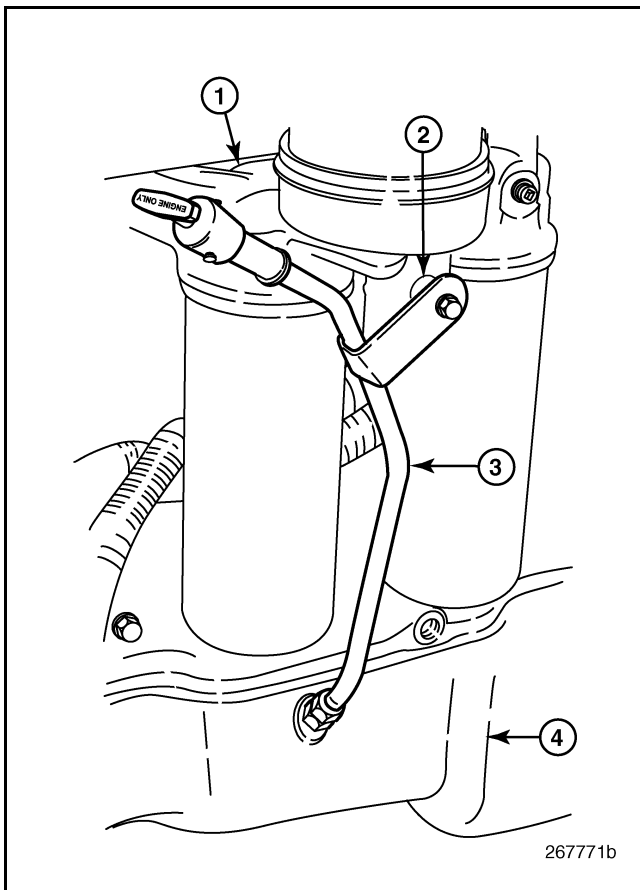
Oil Dipstick Tube, Left Side Installation (AC Engine)
